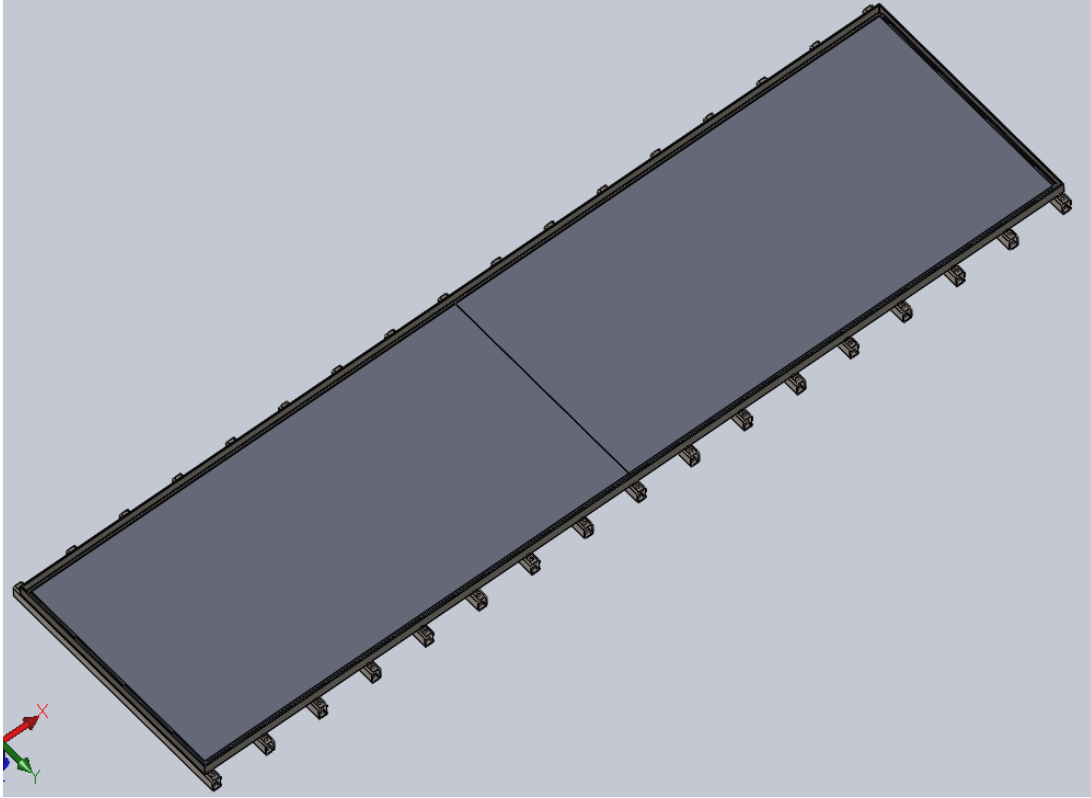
The Bottom Outer Shell was Inserted Into the Steel Frame
